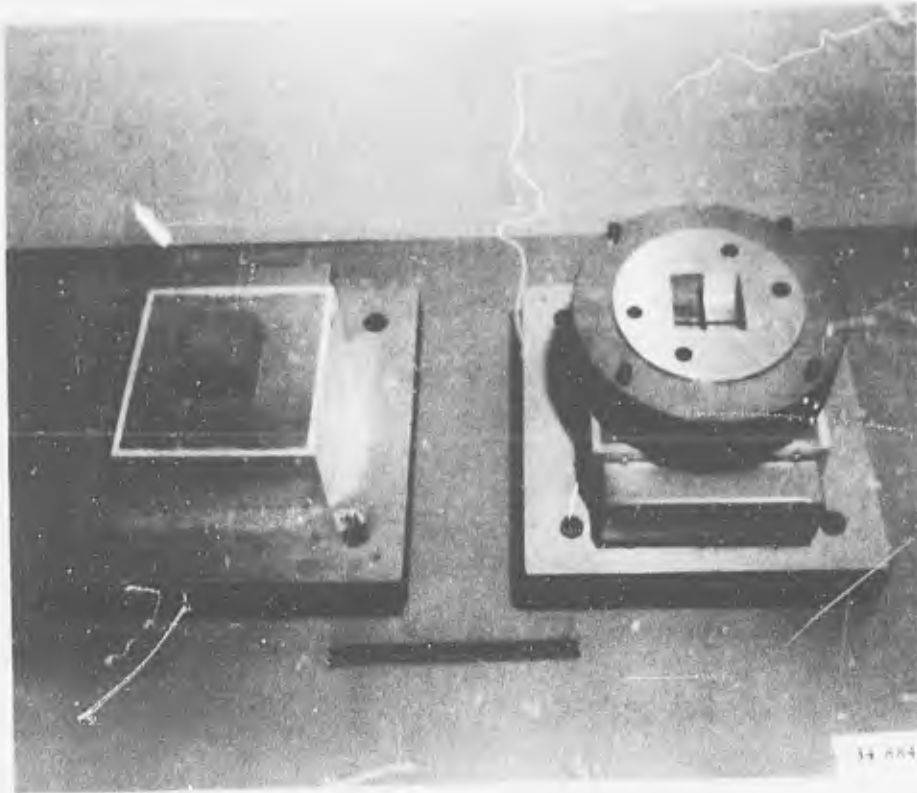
Electrically Heated Tools for Initial Forging Research - Upper Punch and Lower Die.
